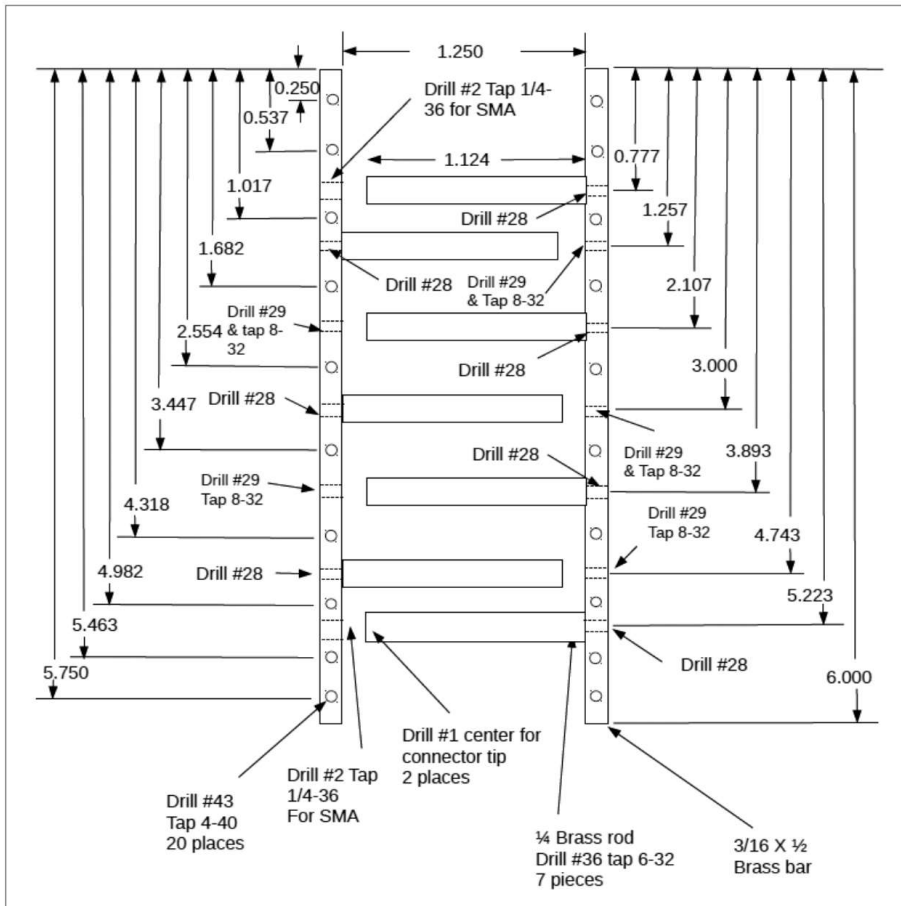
Mechanical drawing for 2310 MHz test filter.
